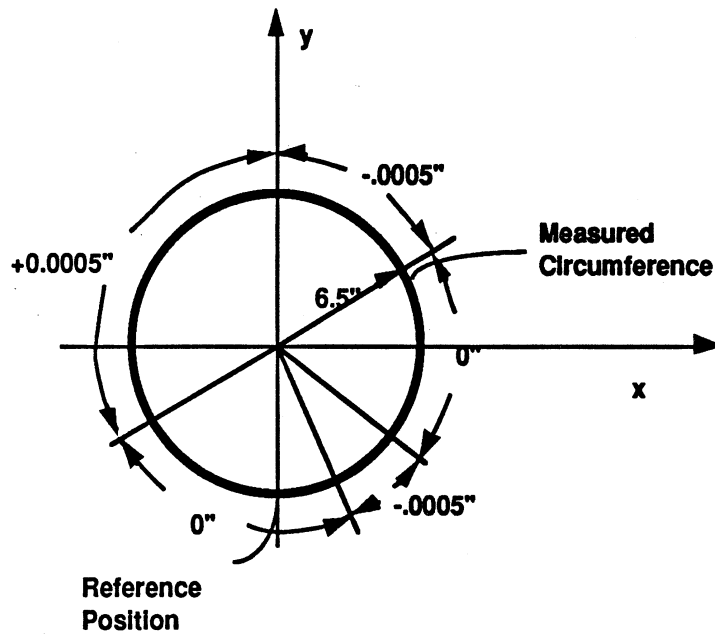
Analysis of Spindle Tilt Using a Dial-Gage Indicator with a measurement radius of 6.5 inches - The Measured results on Fadal CNC 80 Milling Machine Center
